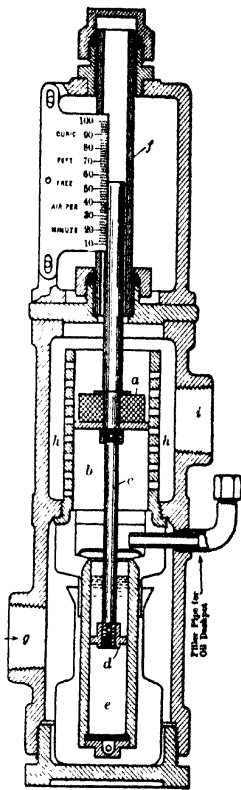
The "Toolom-eter," for Measuring Compressed Air.
